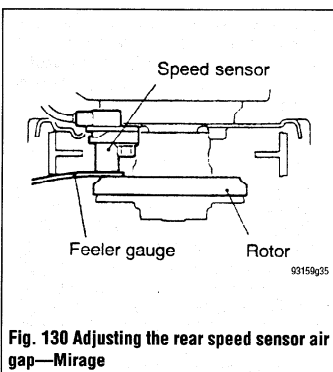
Adjusting the rear speed sensor air gap—Mirage
